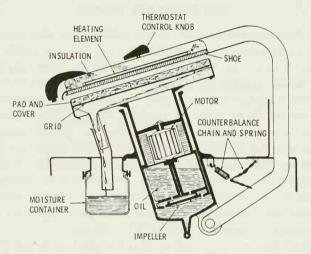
The cross-sectional view of a typical flatplate-type electric ironer. The thruster motor is the principal part of this mechanism; when energized, it rotates the impeller and, through a spinning action, lifts the motor, thruster assembly, and ironer board against the ironer shoe, thus praviding the necessary ironing pressure.
